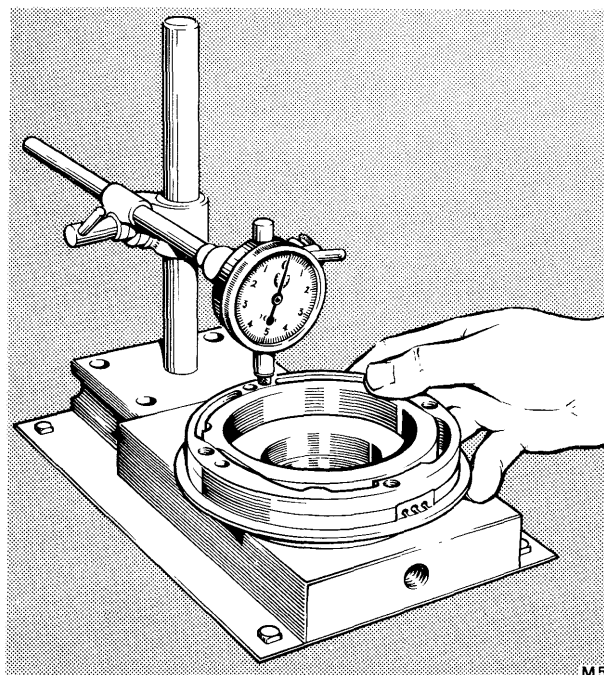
CHECKING THE SLIDE END CLEARANCE
